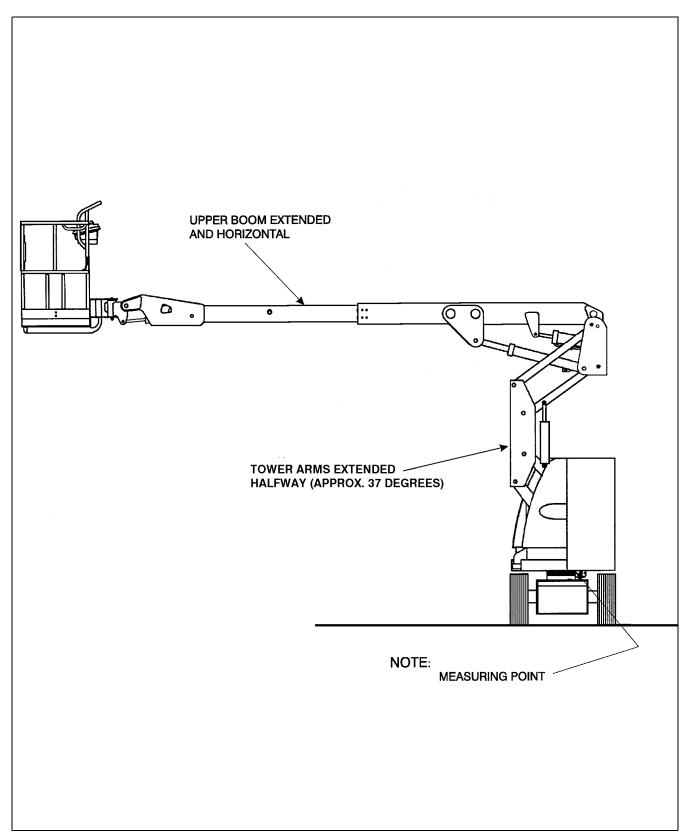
Swing Bearing Tolerance Boom Placement
